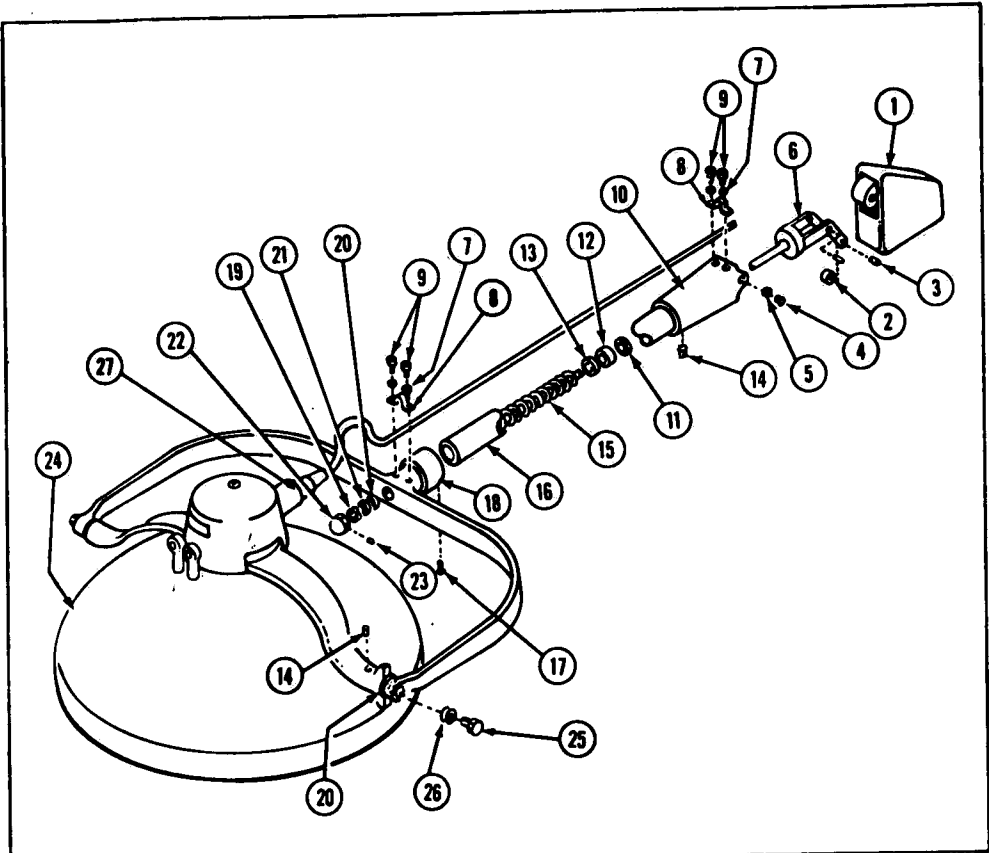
ARM AND REFLECTOR ASSEMBLY.
